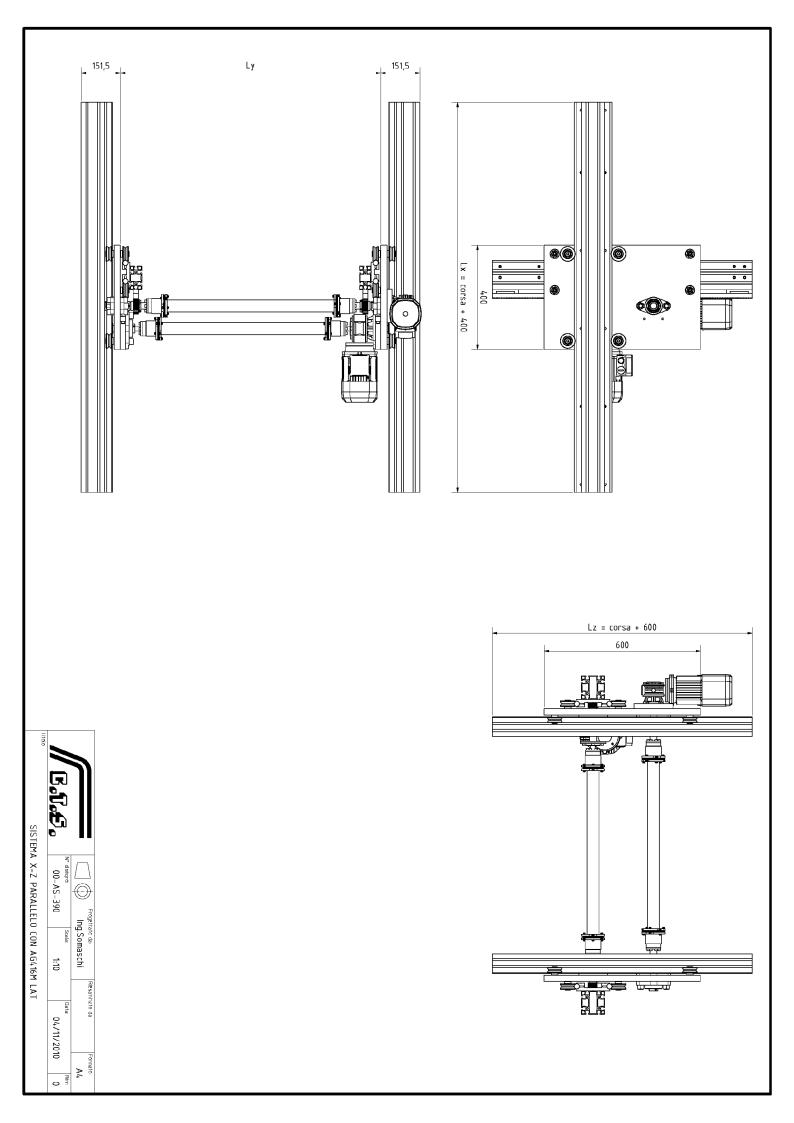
AS-390 HEAVY VERSION WITH AD416/AG416 GUIDES
